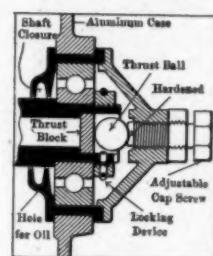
A single ball thrust for use in a transmission gear system, taking the load off of the radial bearings.
